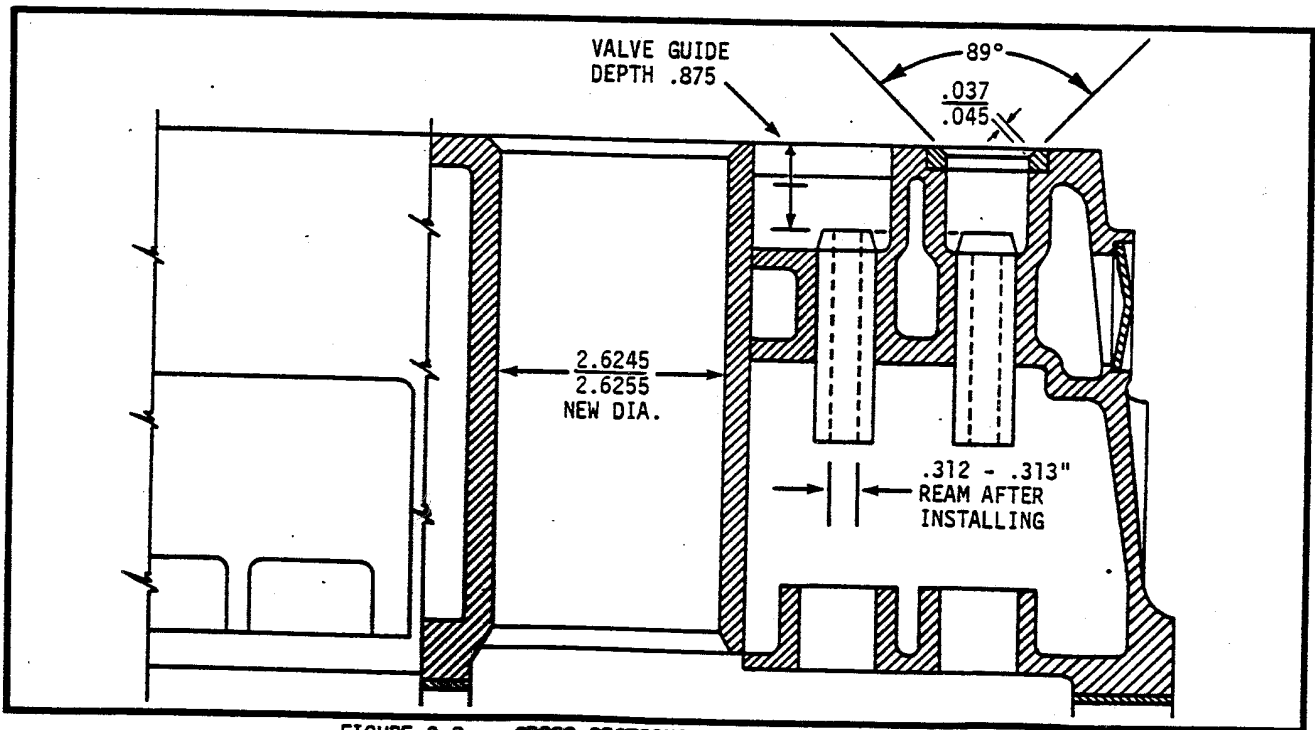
CROSS SECTIONAL VIEW - CYLINDER BORE
